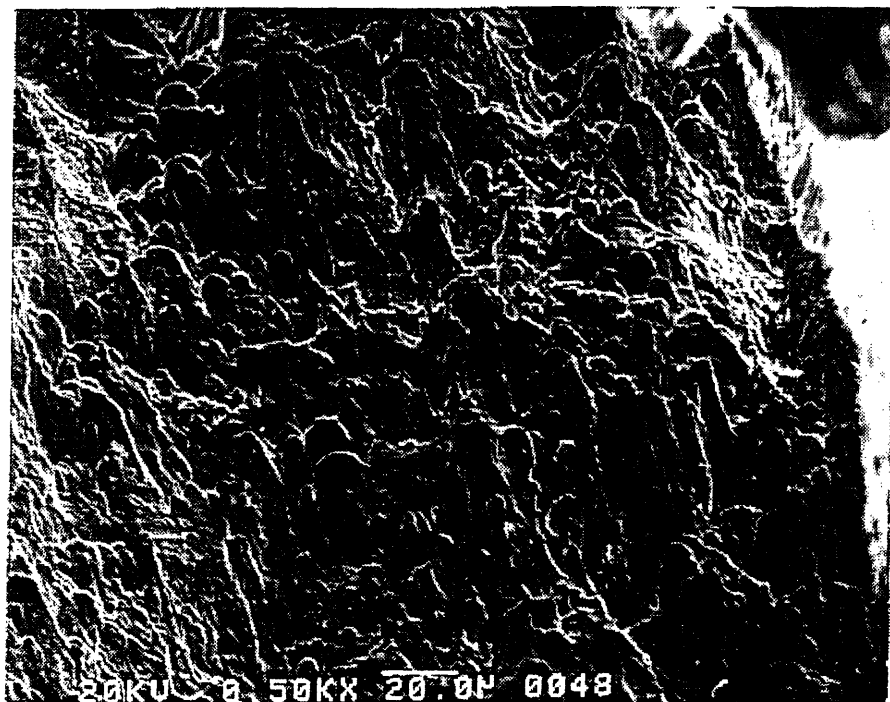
High magnification image of the shear ductile fracture surface shown above.
